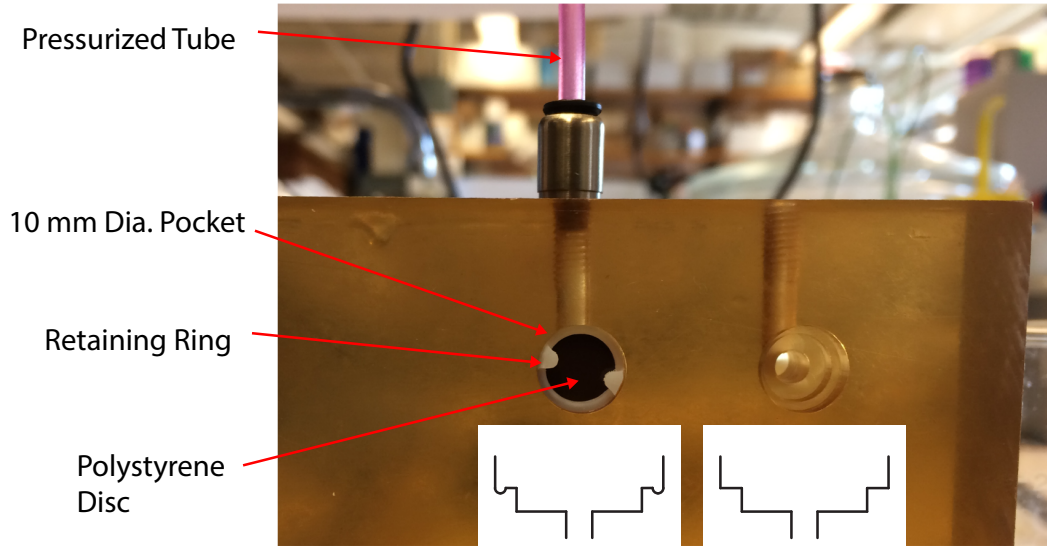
A fixture for leak testing retaining ring prototypes. Two pockets 10 mm in diameter, one with the sealing land (left) and one without (right), were CNC machined into polysulfone. Sections of these profiles are shown. A pneumatic connector (LEGRIS 3171-53-20, Parker Hannefin, FR) sealed to the polysulfone with an o-ring (hidden) and connected to 1/8 in. outer diameter (1/16 in. ID) tubing. Retaining rings were tested with a 9.8 mm diameter polyester shim the same thickness as the scaffold (0.10 in.) to simulate a fully occluded scaffold.
